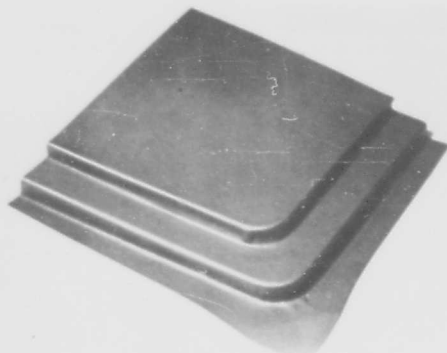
TzM Heat Shield Panel Corner Completely Formed
